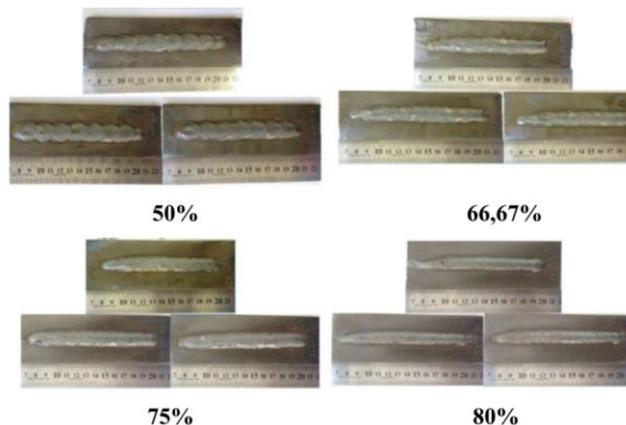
Geometric aspects of weld beads using switchback with the mechanized system.
